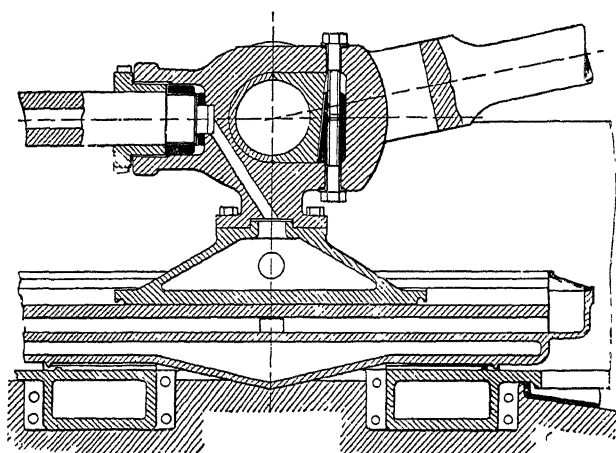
FASTENING THE PISTON-ROD AT THE CROSSHEAD IN THE KÖRTING ENGINE OF THE SIEGENER MASCHINENBAU-AKTIE-GESELLSCHAFT, SIEGEN.
